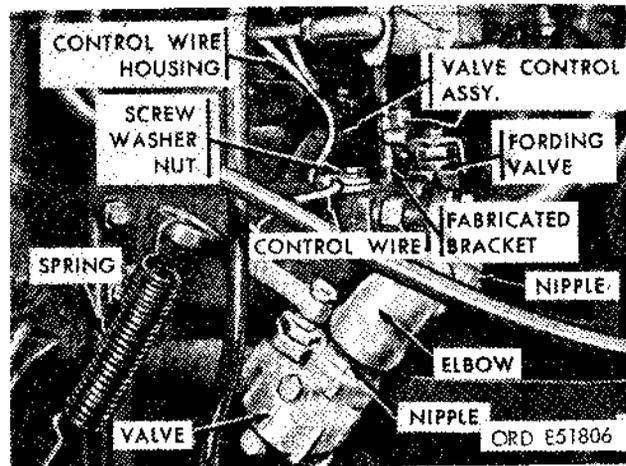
Antidiesel valve and controls—intake manifold modified degasser models.
